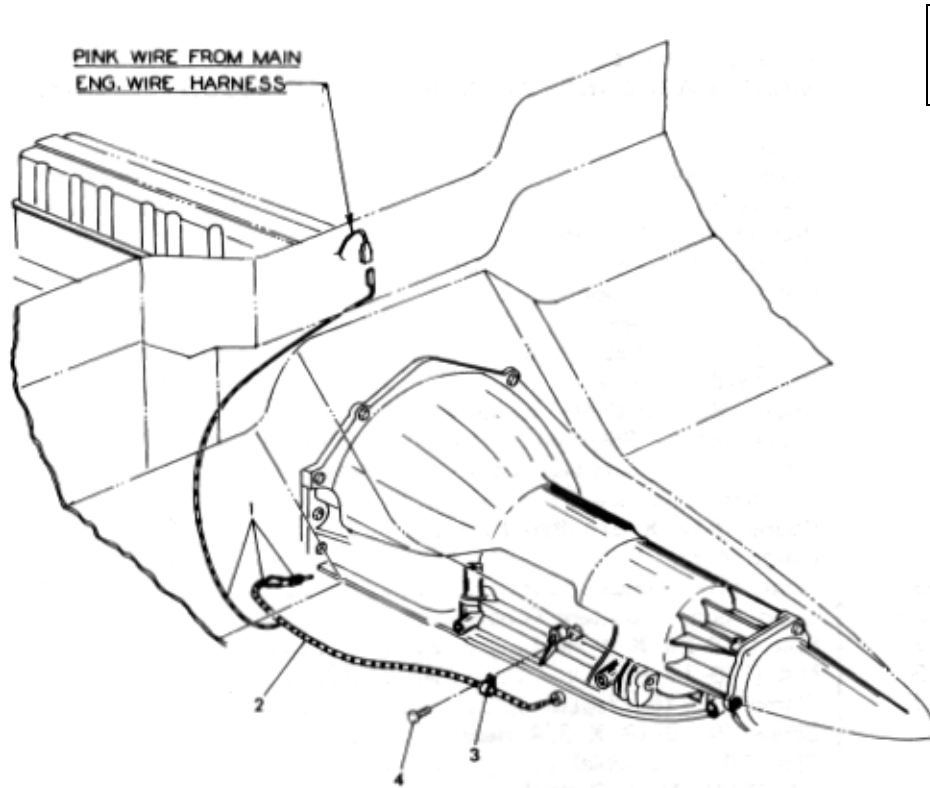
Kickdown Switch and Wiring Installation. 6 & 8 Cylinder
